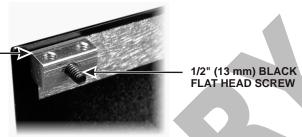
Mounting 2D fastener for KANT3 Standoff.
